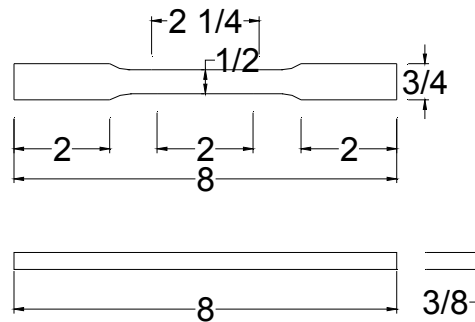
Typical HSS Sub-size Coupon Specimen (units in inch)
